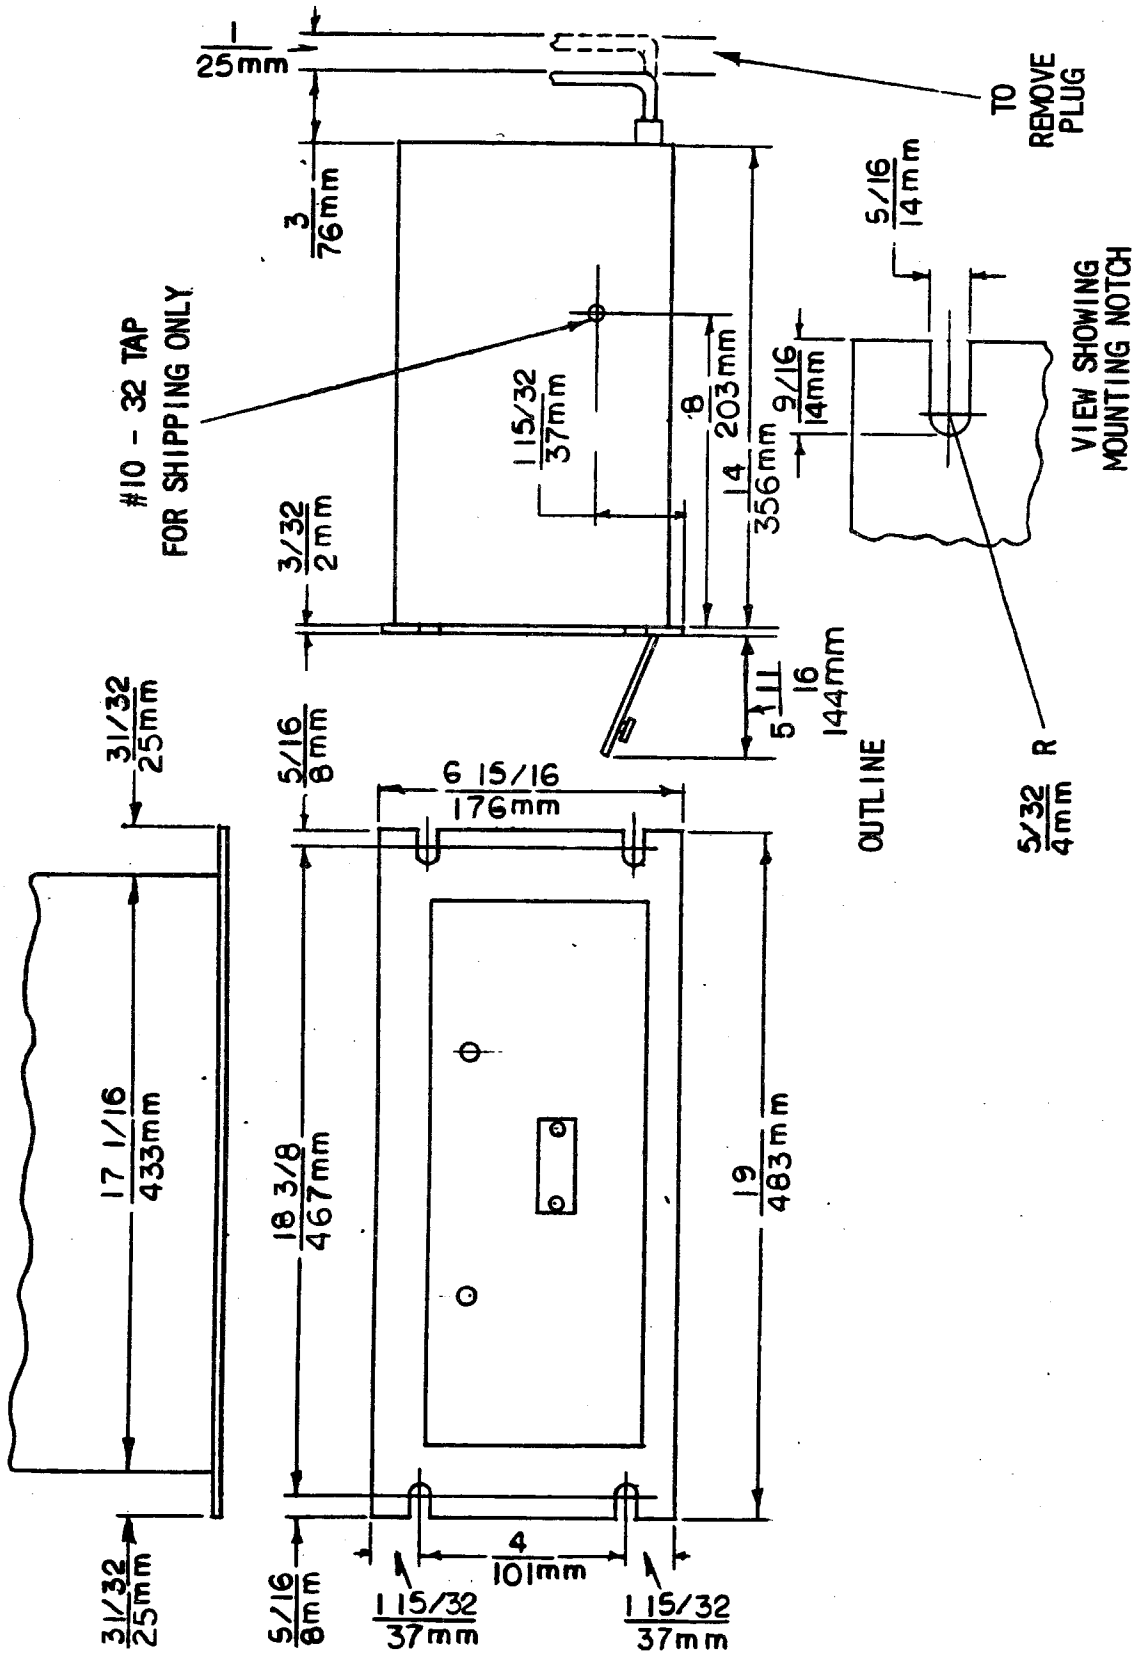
(0227A2037-0) Outline and Mounting Dimensions
